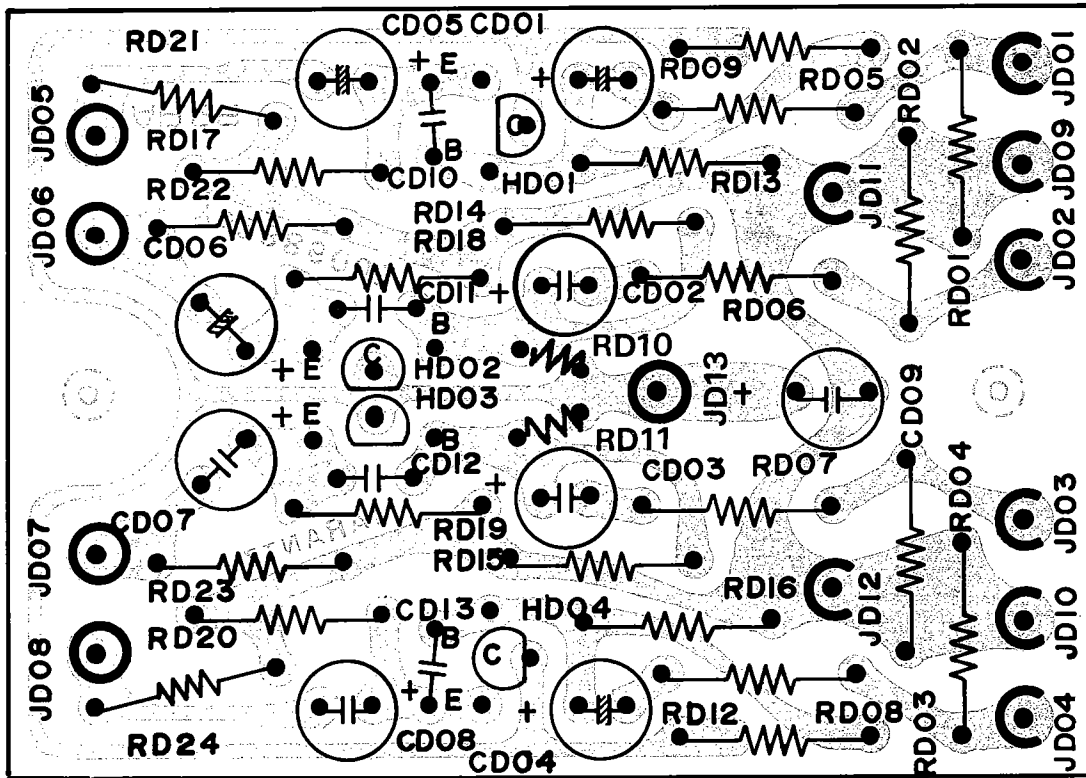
Buffer Amplifier Assembly PD01 Component Locations
